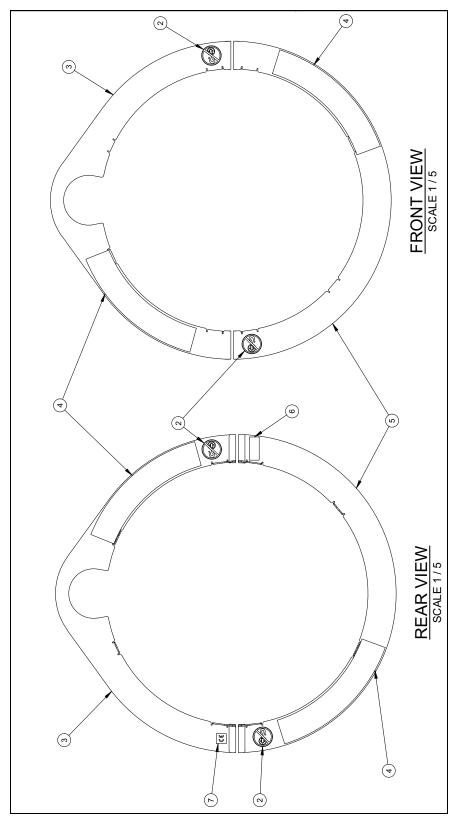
AFC-14 DEFENDER GUARD KIT EXPLODED VIEW (P/N 97209)
